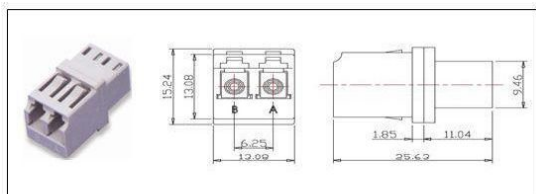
LC RJ45 Duplex Adaptor Appearance & Dimension
